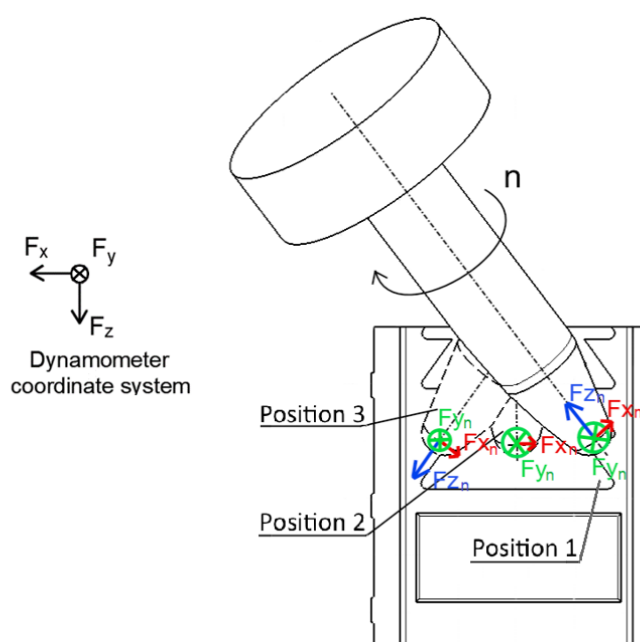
Schematic of the Cutting Process with Circle-Segment End Mill
